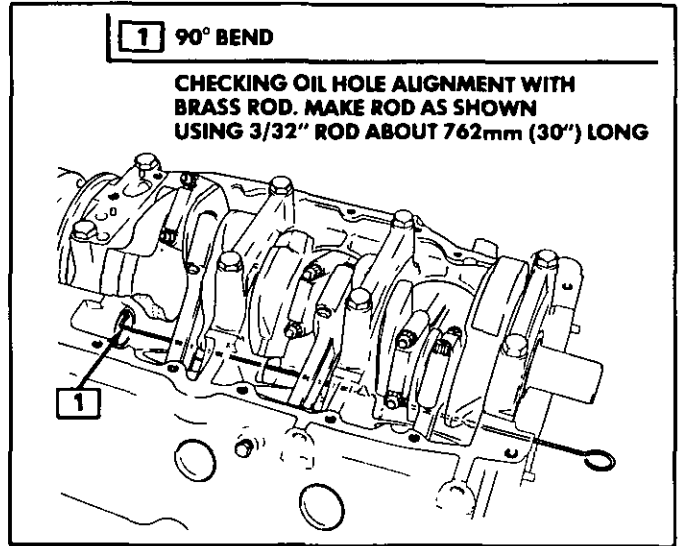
Checking Camshaft Bearing Oil Hole Alignment
